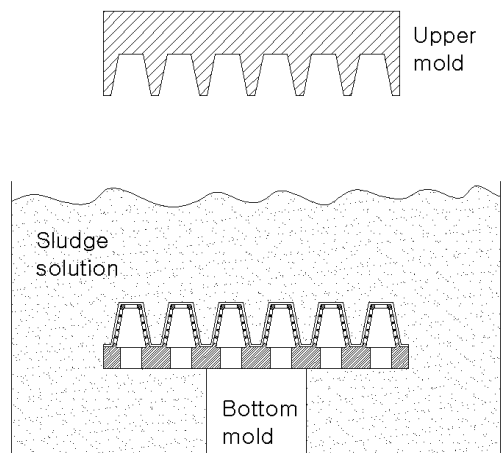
Bottom mold submerged for collecting solids from the fluids.
